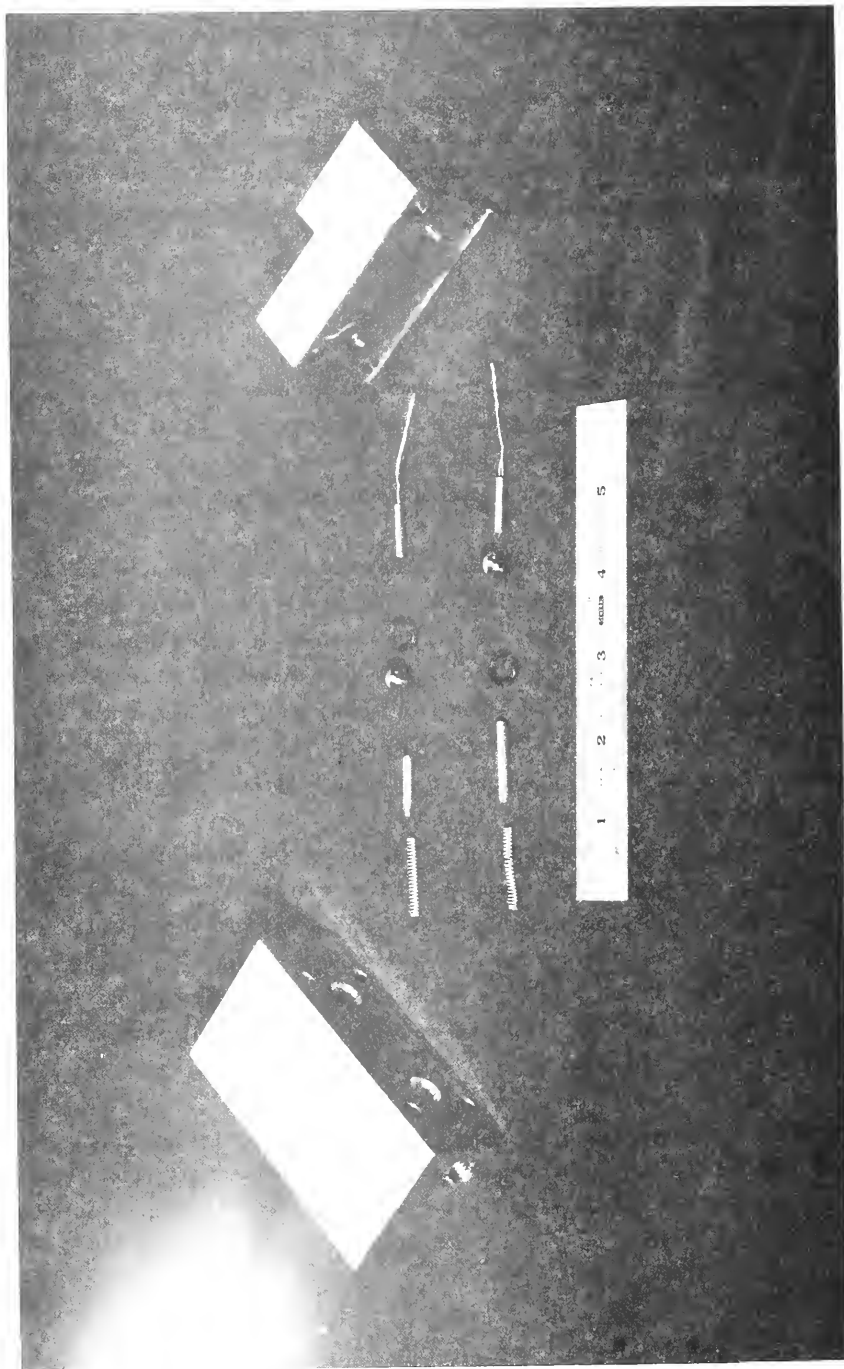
EXPLODED VIEW OF ON-OFF PYROTECHNIC VALVE
